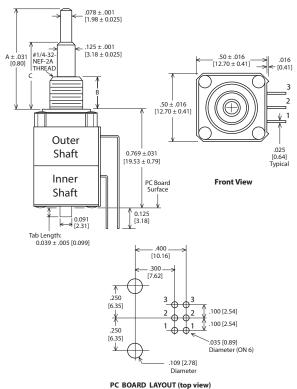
C9: C-9 Dual Potentiometer, Concentric Shaft, PC Pin Terminals, 1/4" Dia. Bushing
